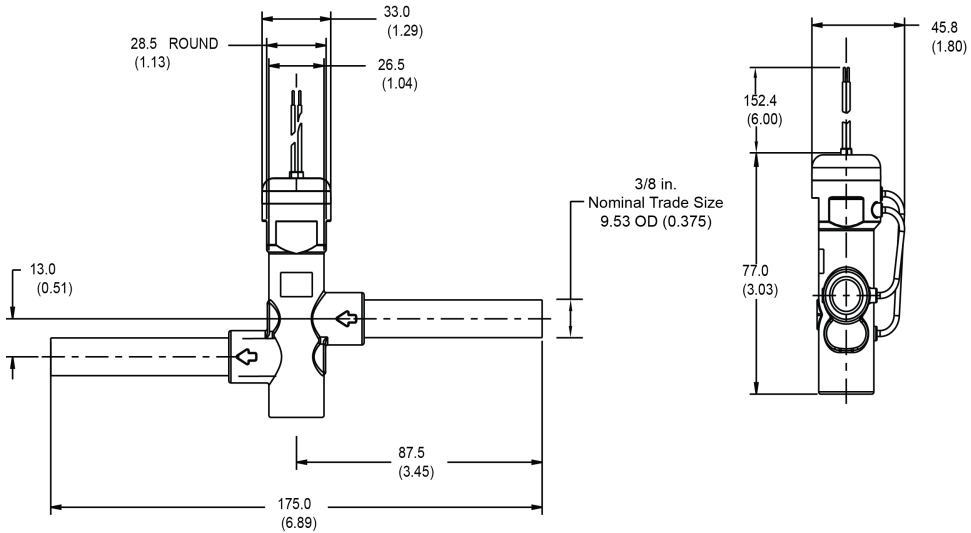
QREV09-QREV15 type valve dimensions, mm (in.)
